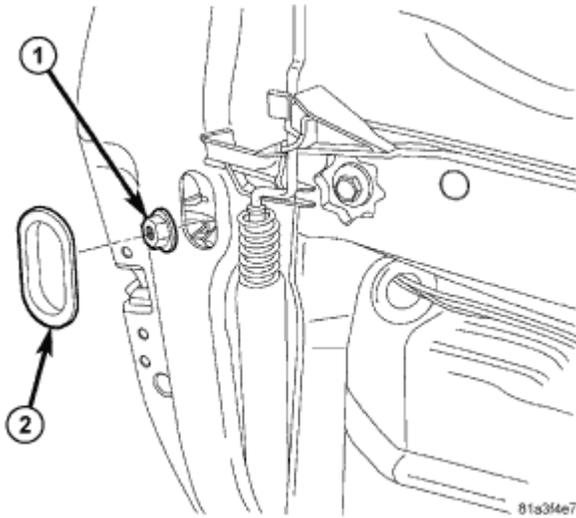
Removing/Installing Door Plug & Rear Exterior Handle Nut
